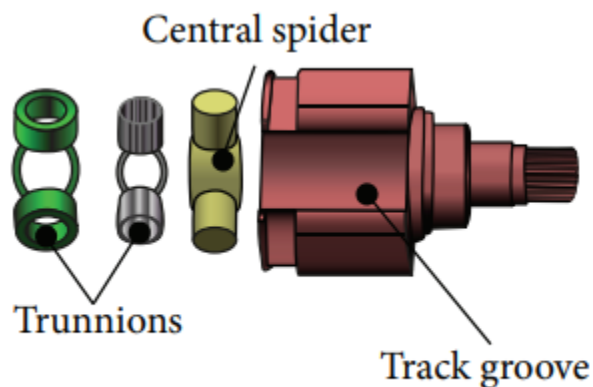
View of a Tripod CV joint. The axle on the right connects to the spider, the part that has the three roller bearings. This subassembly then is placed inside the outer race or housing which is connected to the other axle².
